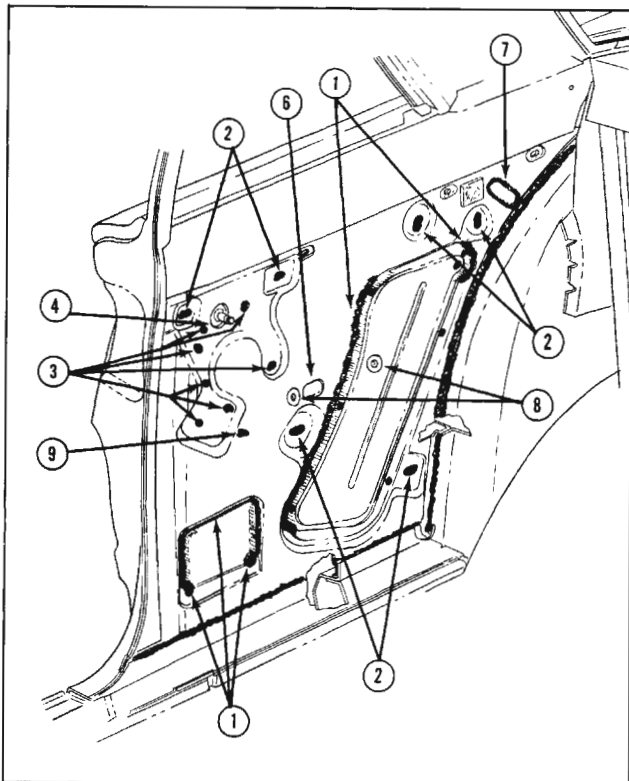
Inner Panel Sealing (17, 27 & 47 Styles)
